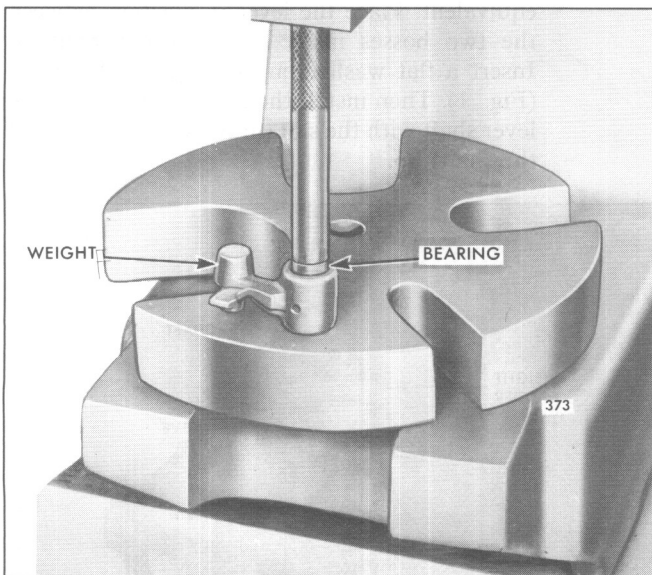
Installing Bearings in Governor Weight using Tool J 8985
